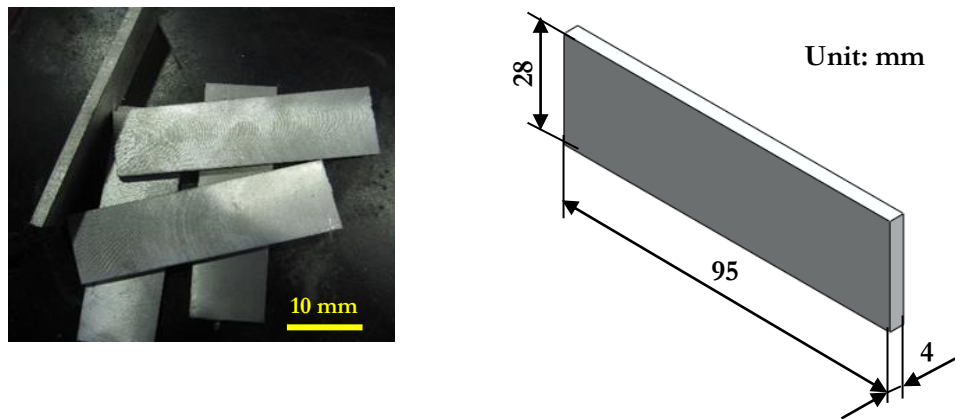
The process of preparation SSM 7075 aluminum alloy for friction stir spot welding.
